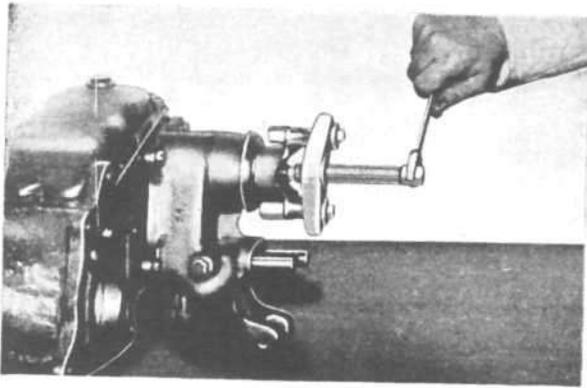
UNIVERSAL JOINT FLANGE PULLER
